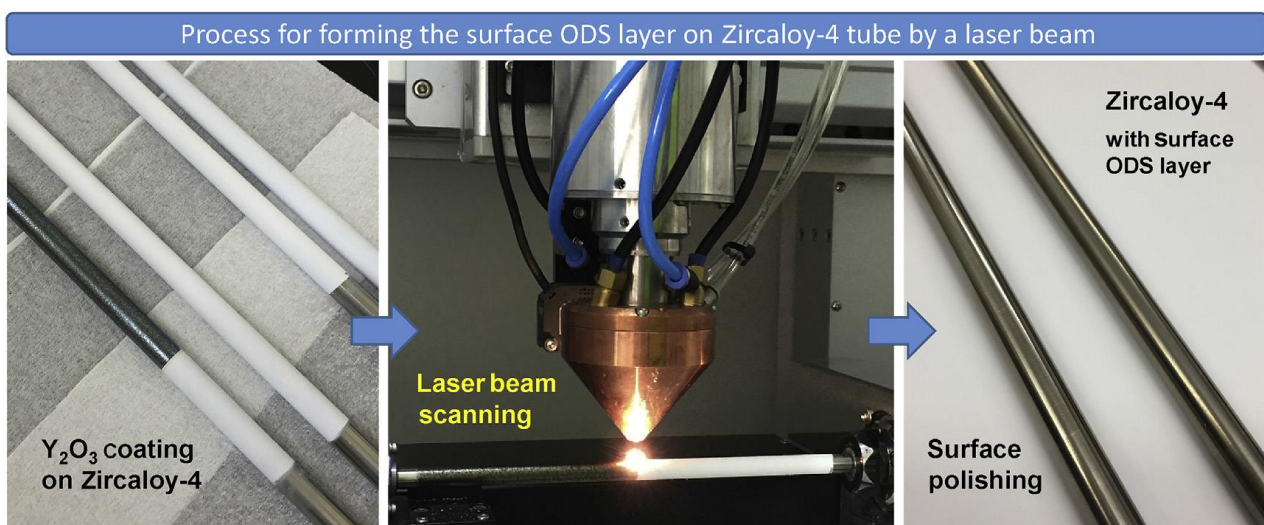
Fabrication process for forming a surface ODS layer on Zircaloy-4 tube using a laser beam [6].
